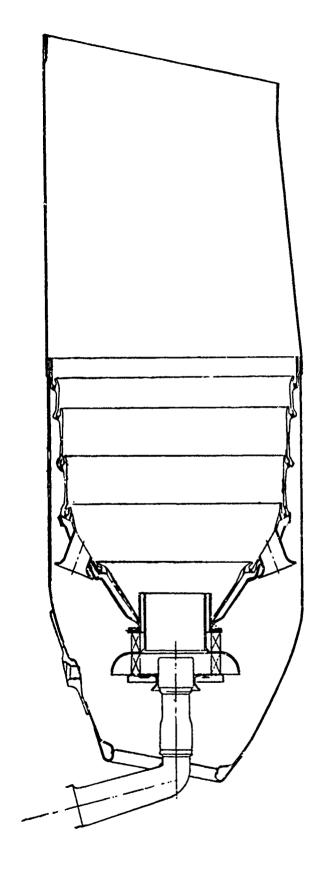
J79-17C Low Smoke, Long Life Combustor Assembly.
